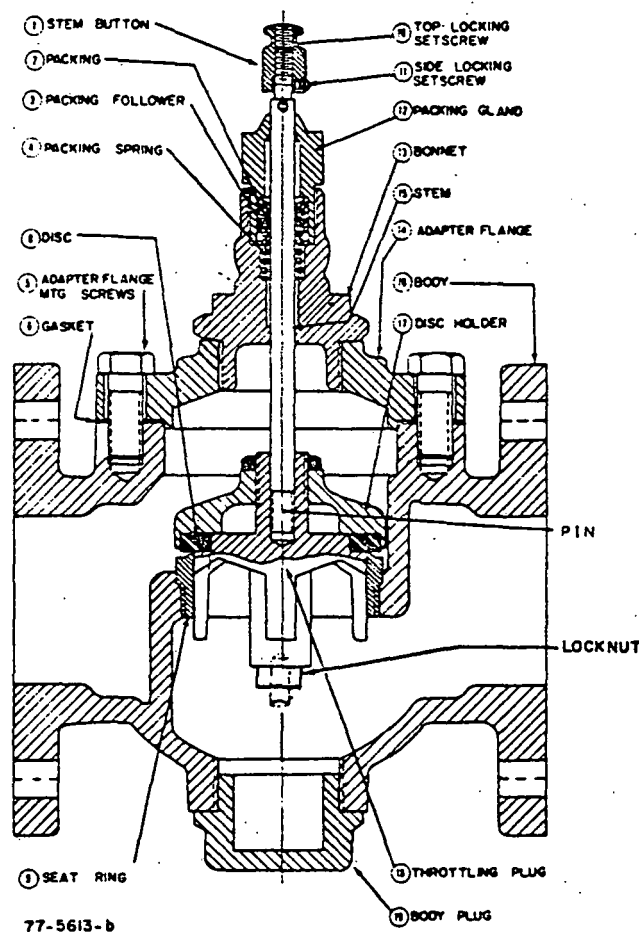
Cutaway of Typical V5011A Flanged Type Body.
